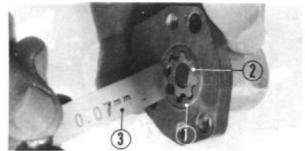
① Outer rotor ③ Feeler gauge ② Inner rotor
